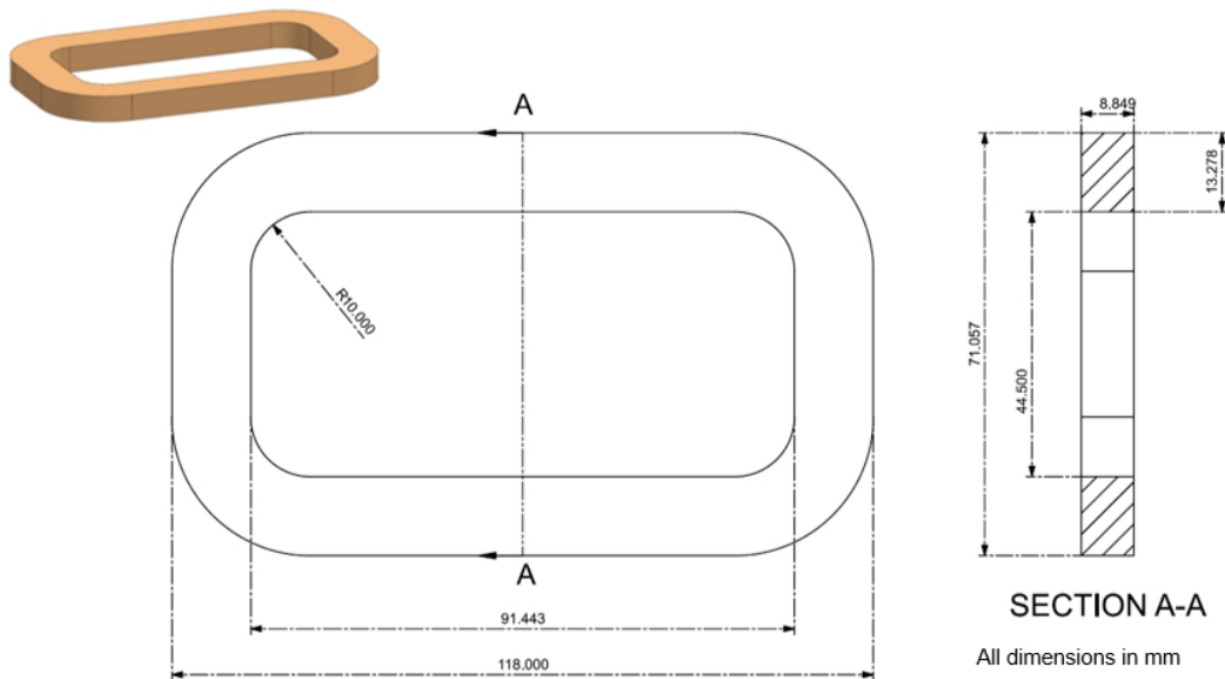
Bottom view of the design model and the detailed dimensions of the MQW coil bobbin.
